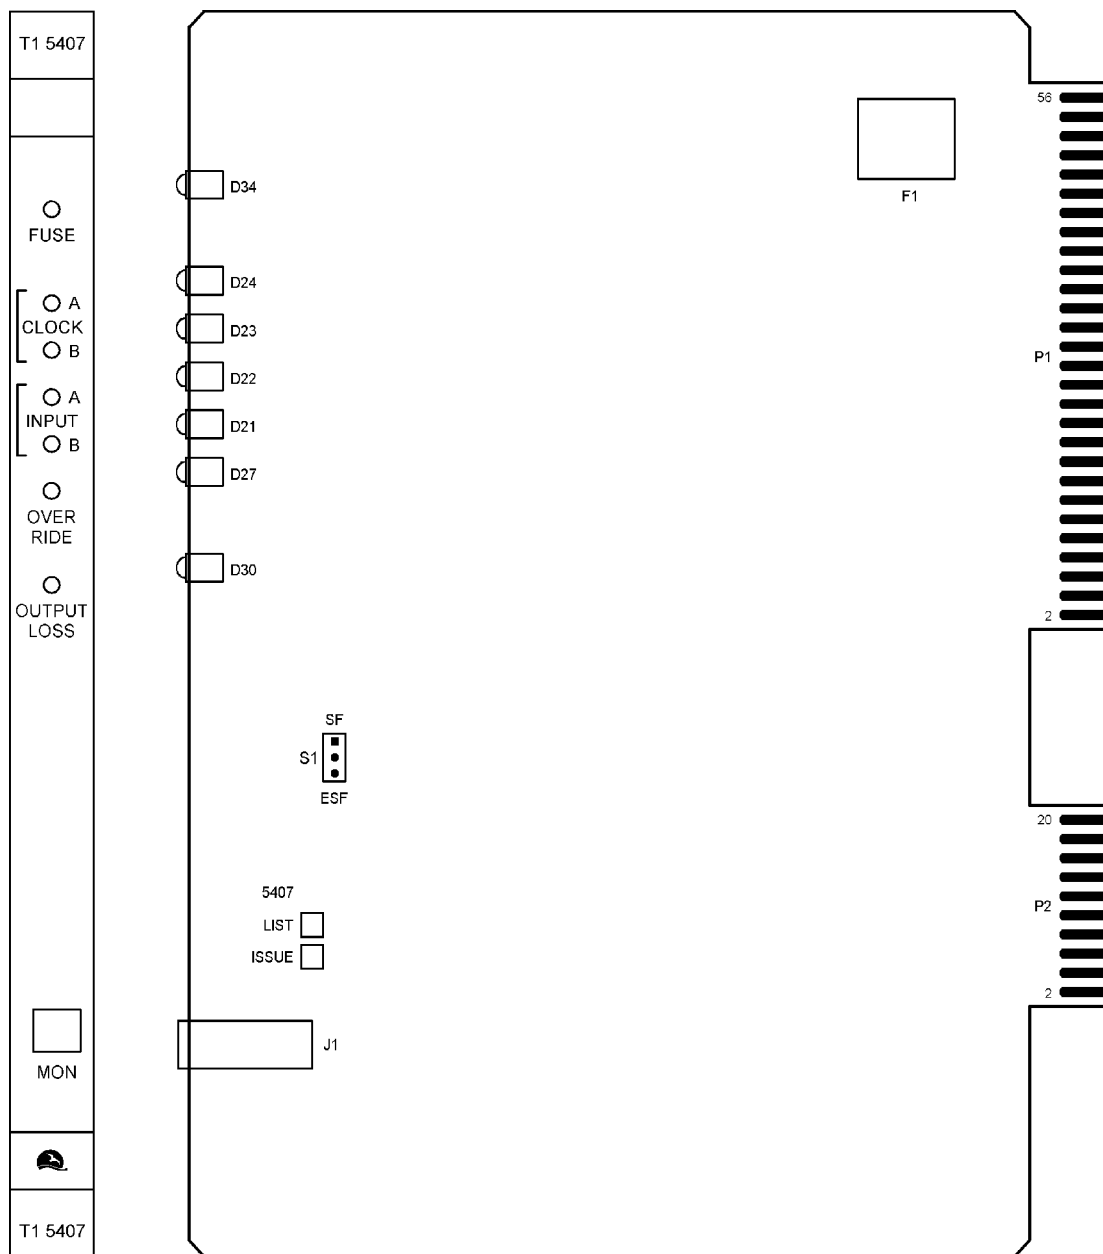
Model 5407 DS1 Output Driver Card with Front Panel
